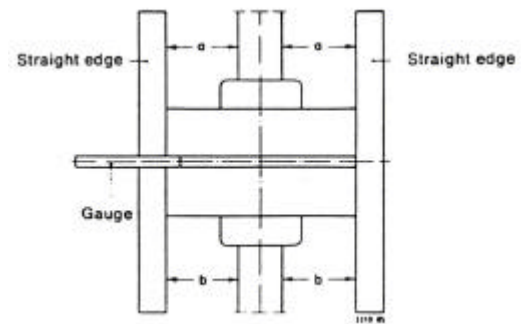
Aligning the coupling with the aid of a straight edge and gauge
